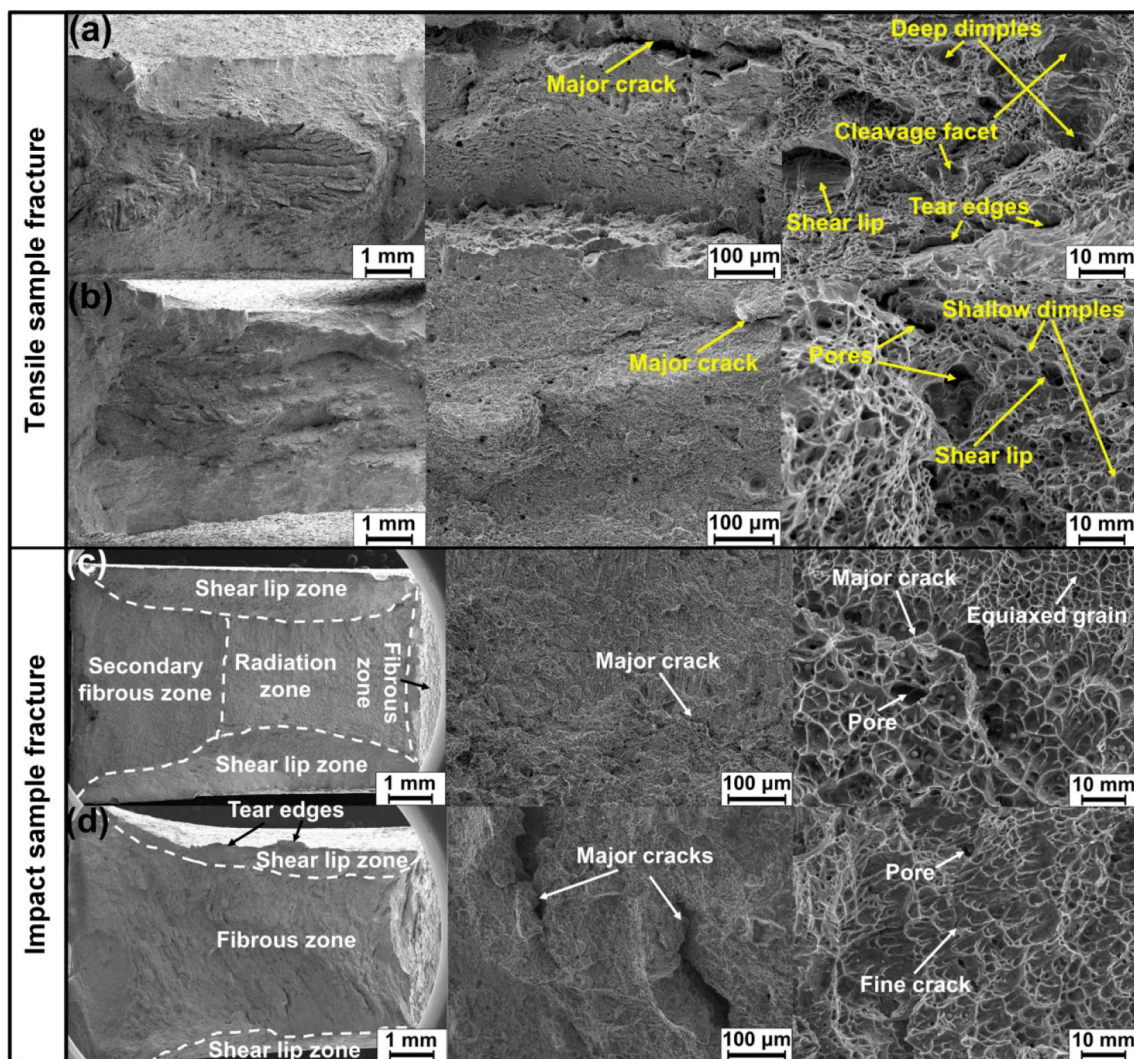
Fracture morphology. a Tensile fracture of TX-80 weld; b tensile fracture of ER 307Si weld; c impact fracture of TX-80 weld; d impact fracture of ER 307Si weld
